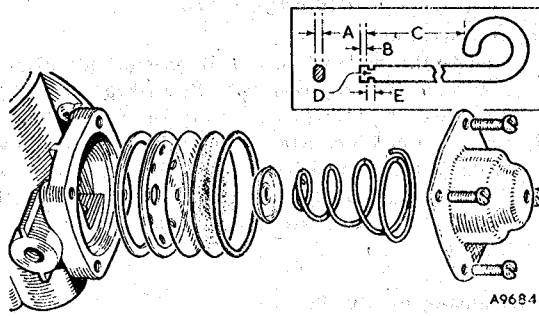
The delivery flow smoothing device. AUF 300 range pumps. (Inset enlarged) an assembly tool made from $\frac{1}{8}$ in. (3 mm.) dia. (10 s.w.g.) iron wire. A, B, and E = $\frac{1}{8}$ in. (1.6 mm.), C = 2 in. (50 mm.), D = .090 in. (2 mm.)
